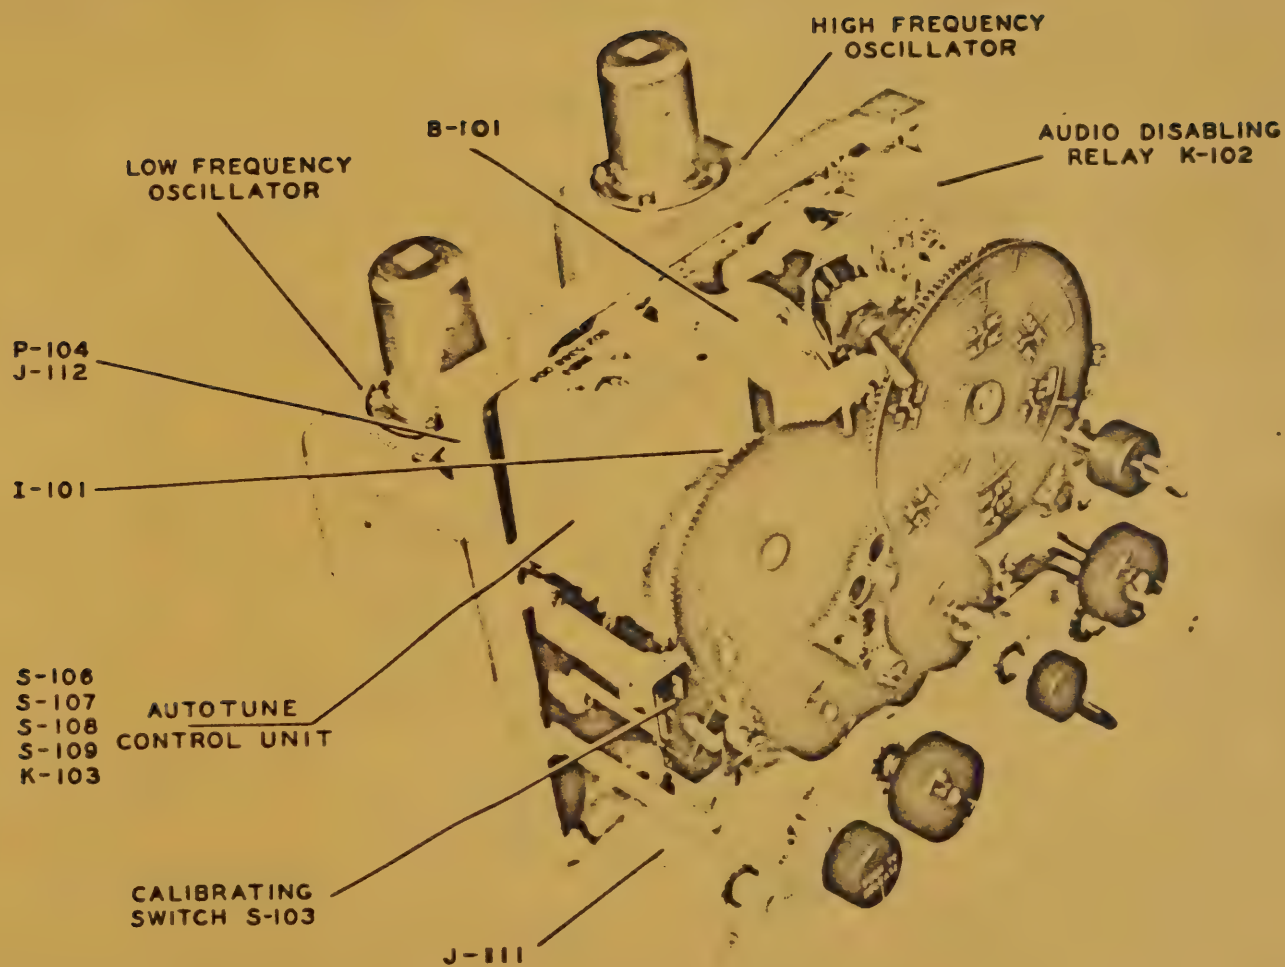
Autotune Casting Assembly, Top Left Oblique
